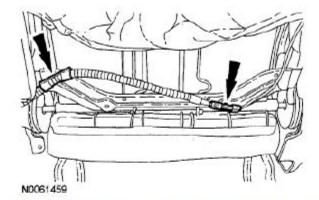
Locating Side Air Bag Module Wiring Harness Retainers From Seat Backrest Frame Courtesy of MAZDA MOTORS CORP.
